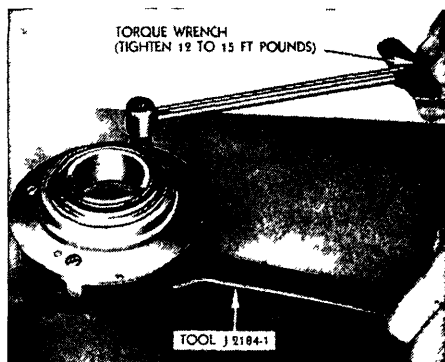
Apply sealing compound under screw heads and fasten cover to pump. Remove feeler stock, turn pump over and install other screws. Assemble pump over front drive gear, aligning keys to keyways
